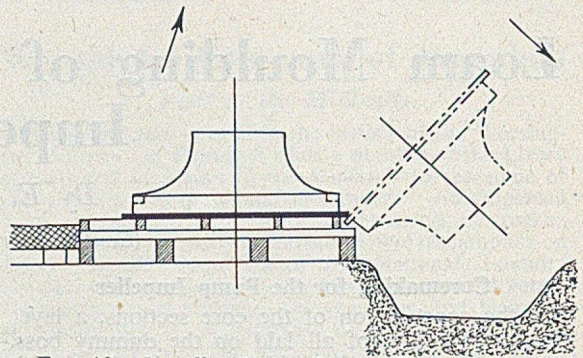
Impeller Core, showing the Method of Turning-over—First Stage.
